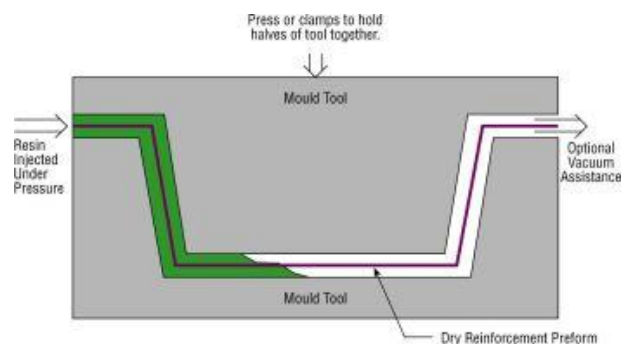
Schematic view of RTM (Resin Transfer Moulding (n.d.), 2012)
